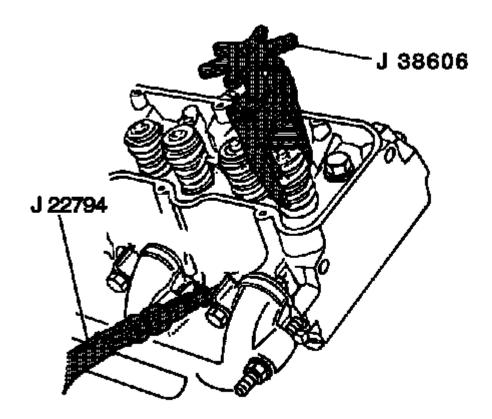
Compress The Valve Spring (Cylinder Head Installed) Using Special Tools Courtesy of GENERAL MOTORS CORP.
